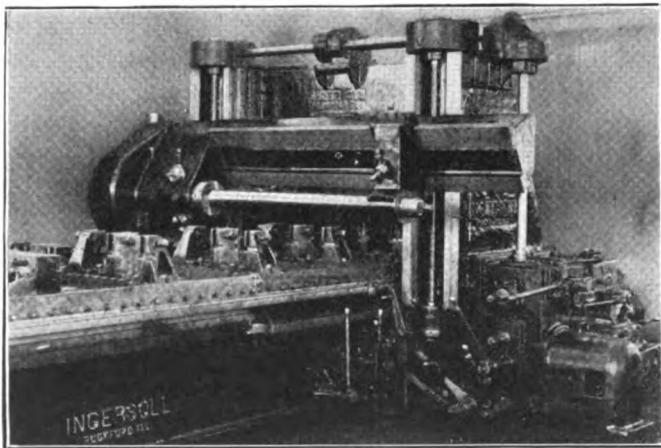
Fixture for holding almost every style of locomotive driving rod
